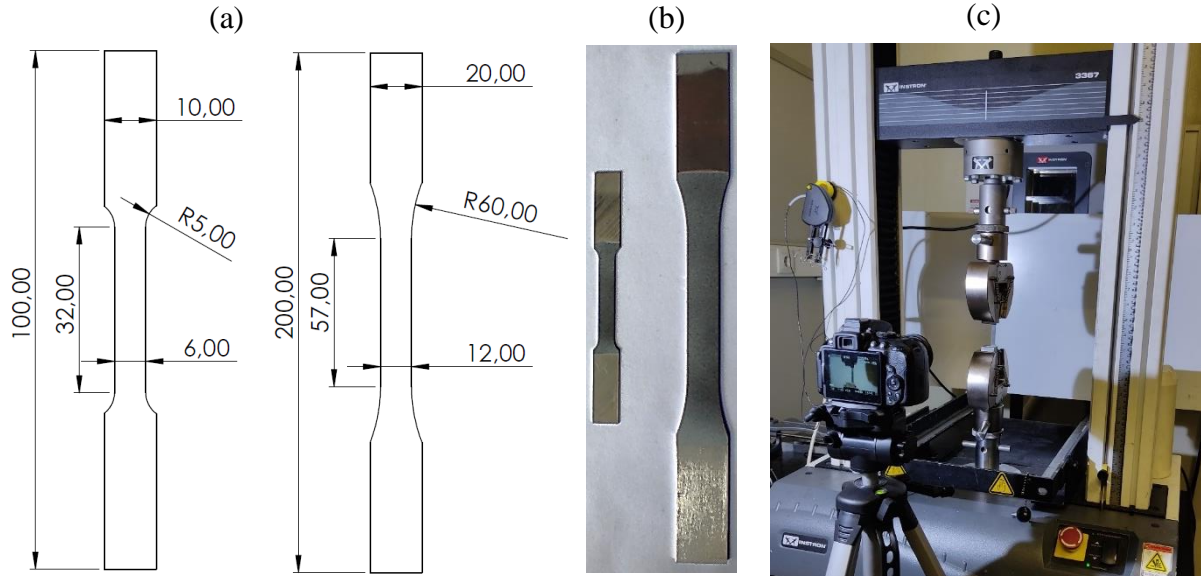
Uniaxial tension specimens and the tensile testing machine: (a) Uniaxial tension specimens geometries and dimensions, (b) uniaxial tension specimens painted with a stochastic pattern and (c) INSTRON 3367 machine and digital camera.
